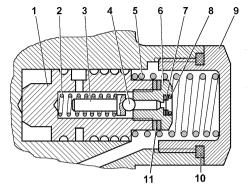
By-pass and u Relief Valves of Pump: 1 -control valve of by-pass valve; 2 -relief valve spring; 3 -guide of relief valve spring; 4 -relief valve ball; 5 -control valve spring; 6 -relief valve seat; 7 -filter; 8 -ring; 9 -plugstopper; 10 -sealing gasket; 11 -adjusting shims
